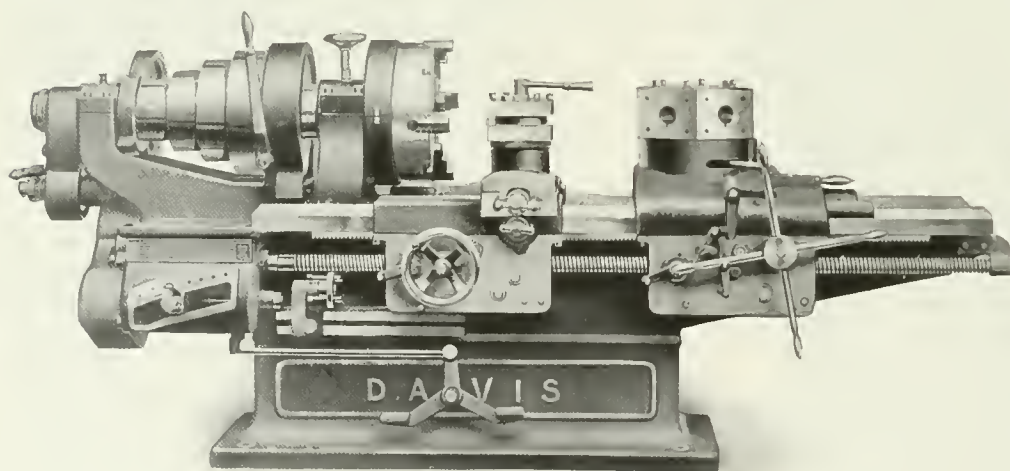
Davis 26-inch Turret Boring, Forming and Turning Lathe
